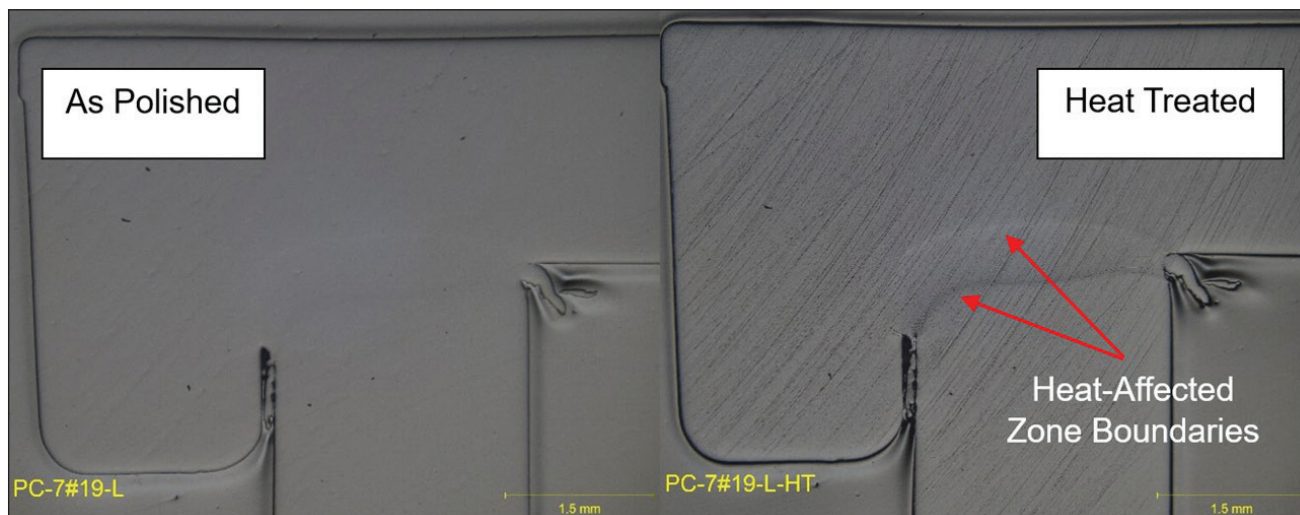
Cross section of PC weld showing good intermolecular diffusion.
